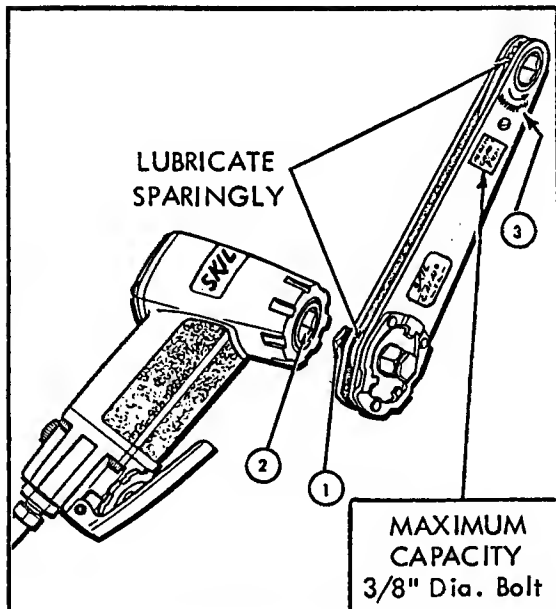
ATTACHING FLAT ATTACHMENT TO MODEL 1120 AIR IMP WRENCH
